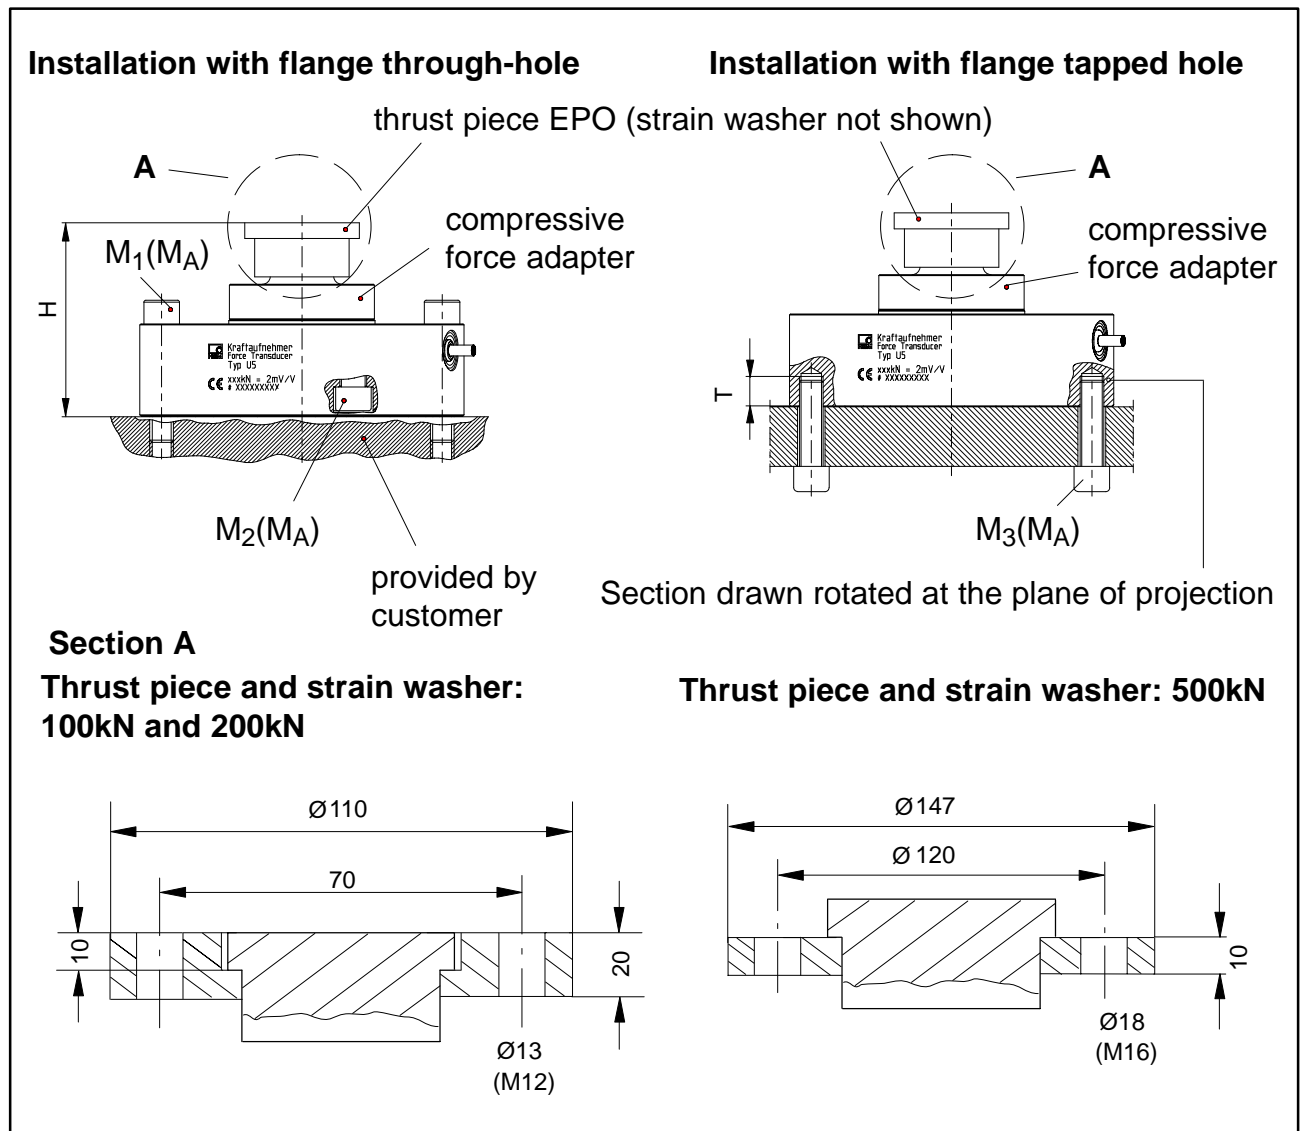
Installation for compressive loading with the compressive force adapter
